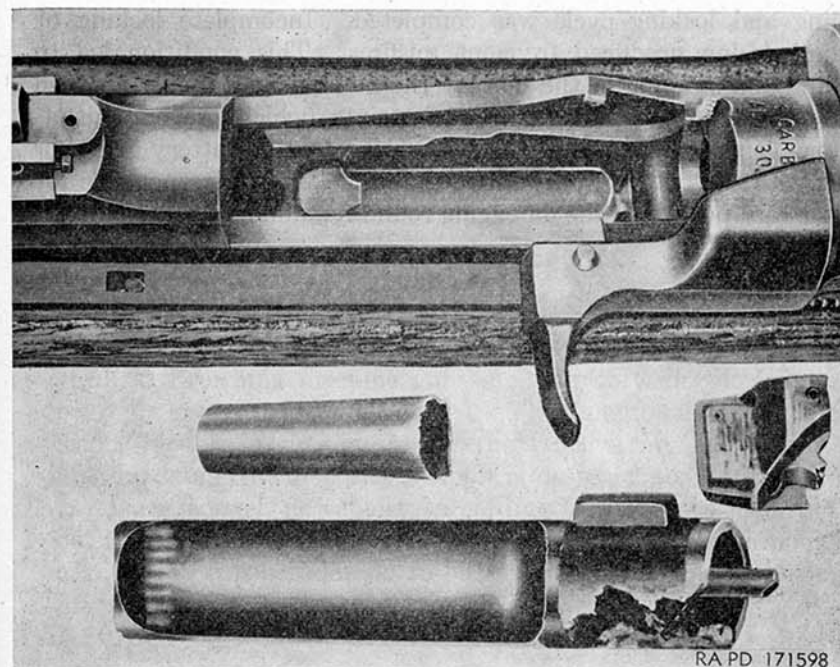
Parts of cal..30 carbine damaged by firing with cracked bolt.
